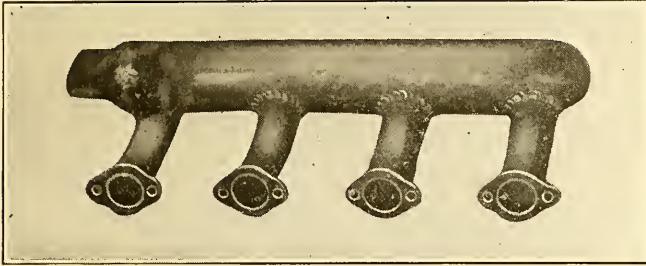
A Welded Motorcycle Manifold.
